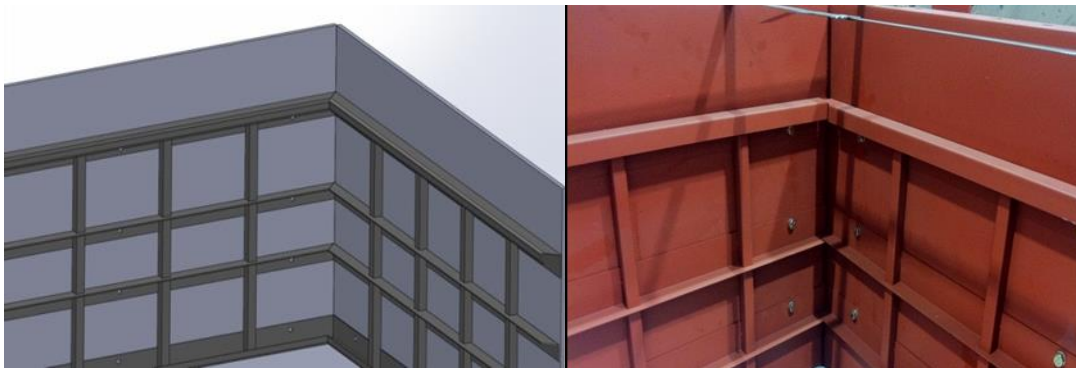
CAD model (*left*) and fabricated (*right*) Duct Seal support frame.
